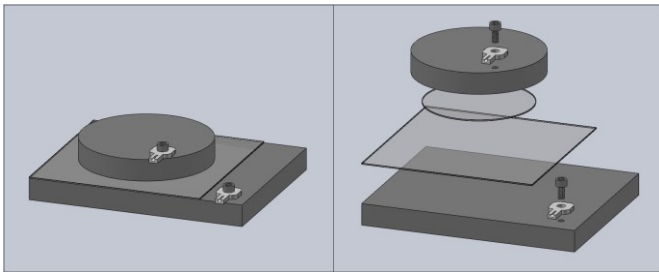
(Left) SolidWorks (SolidWorks Corp: Waltham, MA) representation of probe and (Right) exploded view
